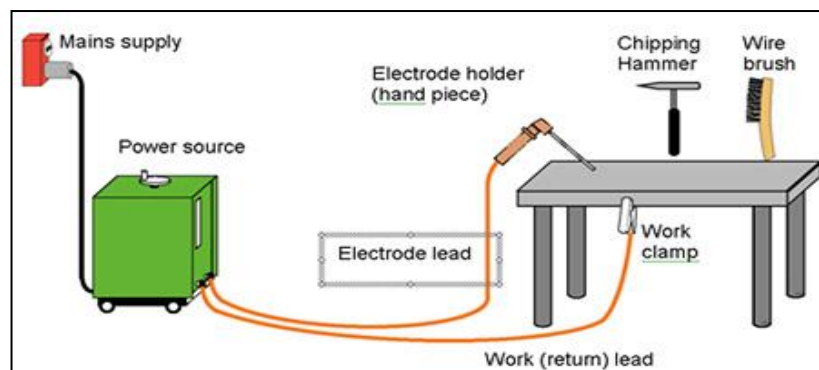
Shielded metal arc welding (SMAW)
